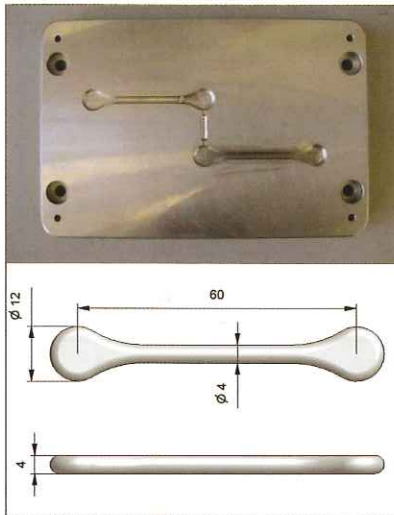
Mould half for tensile test specimen and dimensions of the mould cavity in mm
